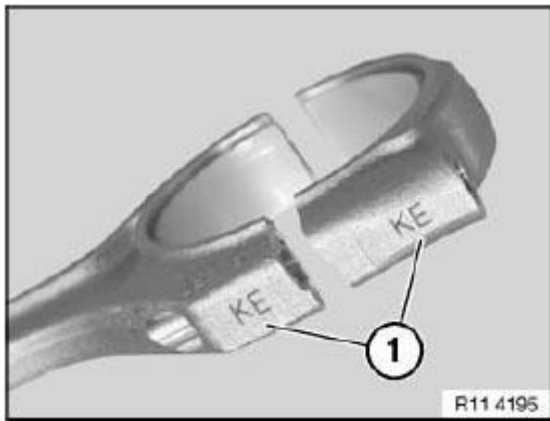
Identifying Conrod Bearing Cap With Identification Marks
